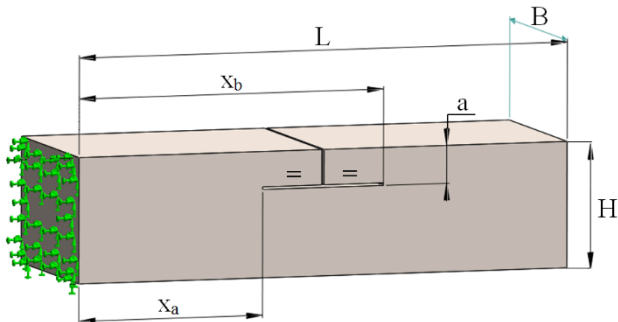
A zoom on the cantilever beam altered by a T-shaped crack
